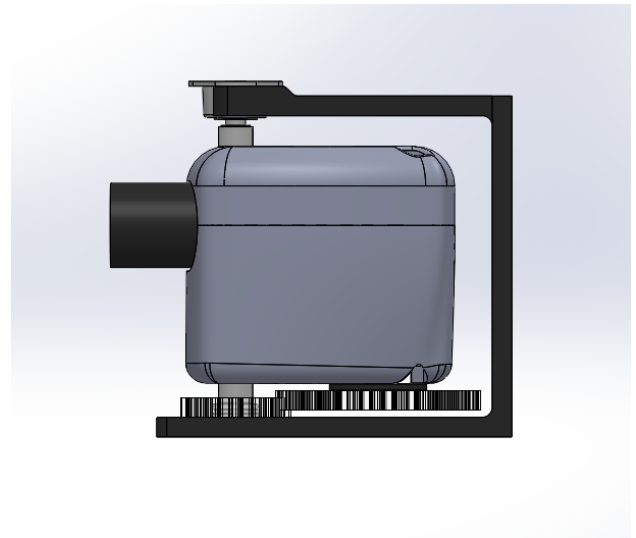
A side-view of the external mechanical design of the Laser Rangefinder. This view shows the 2:1 gear ratio gear trains that were used.
